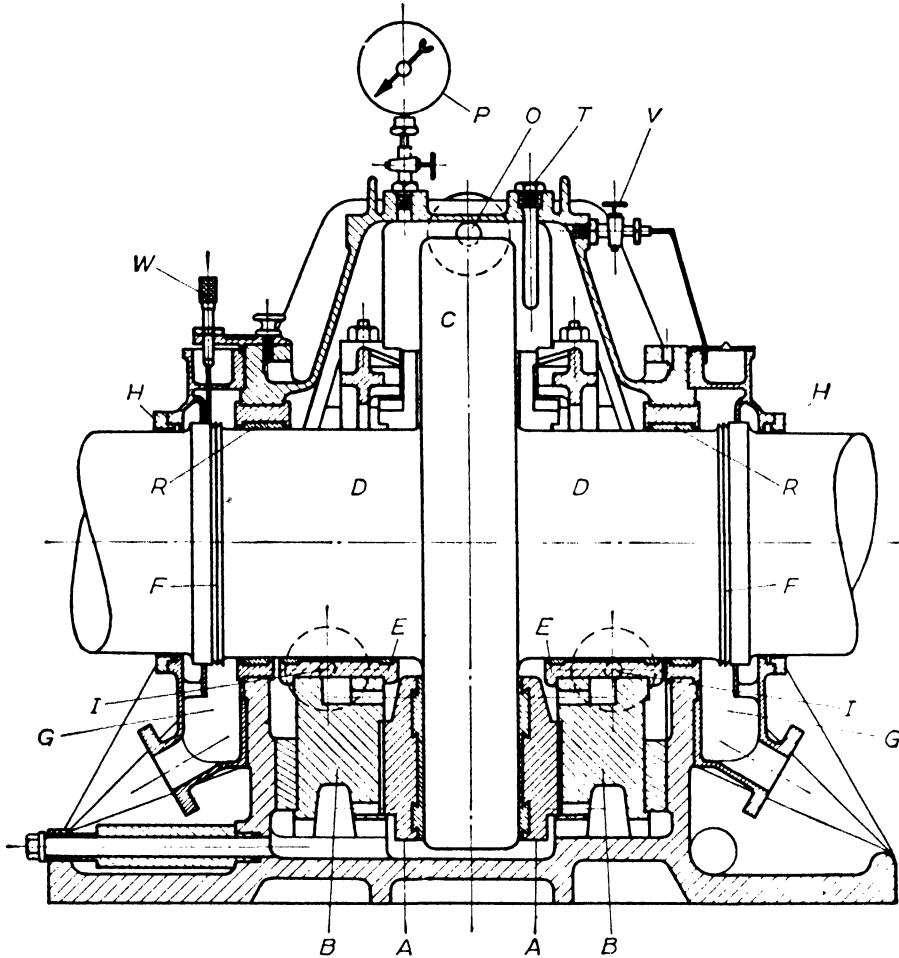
Marine thrust bearing, by Michell Bearings, Limited
